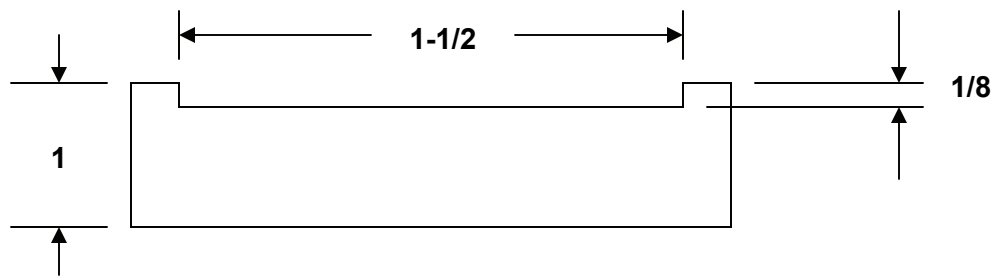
Set-up for Tandem One-sided Welding
